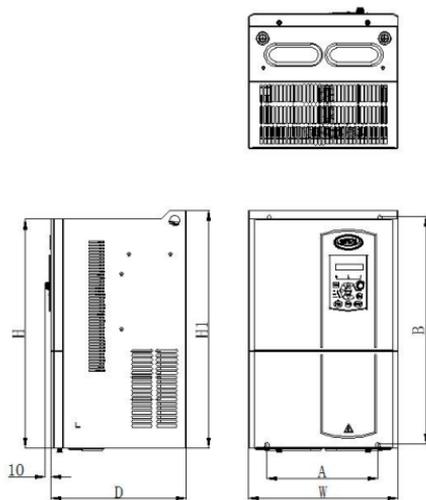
18.5kw-110kw Shape Size and Installation Size
